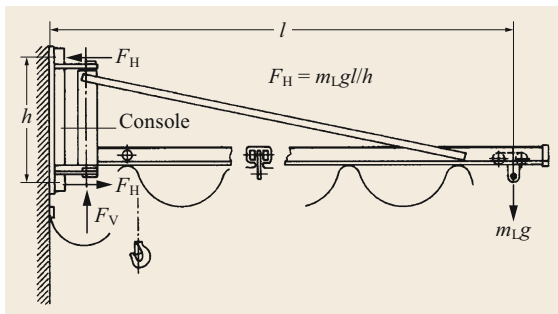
Wall-mounted slewing crane (ABUS)
